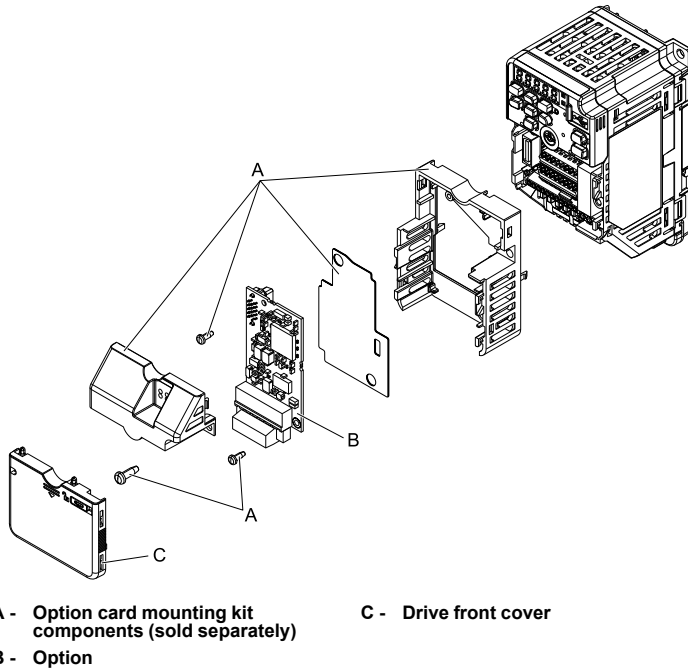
Option Card Mounting Kit (JOHB-GA50)
